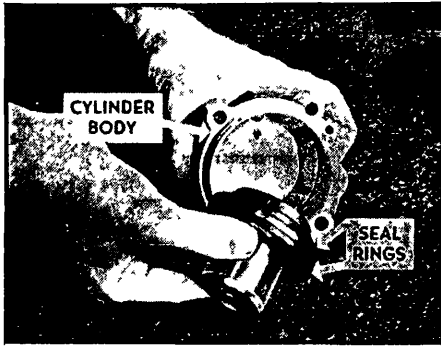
Installing lower seal rings and pistons in cylinder bodies
